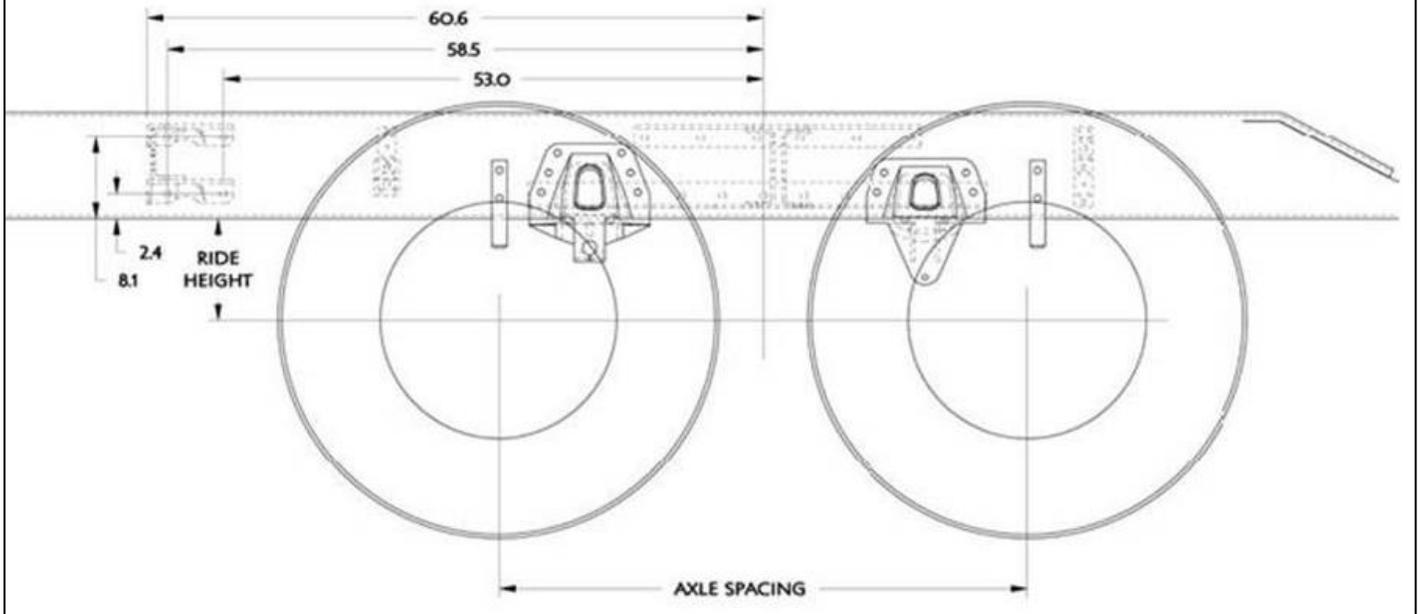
Hendrickson RT/RTE Tandem Frame Drilling
